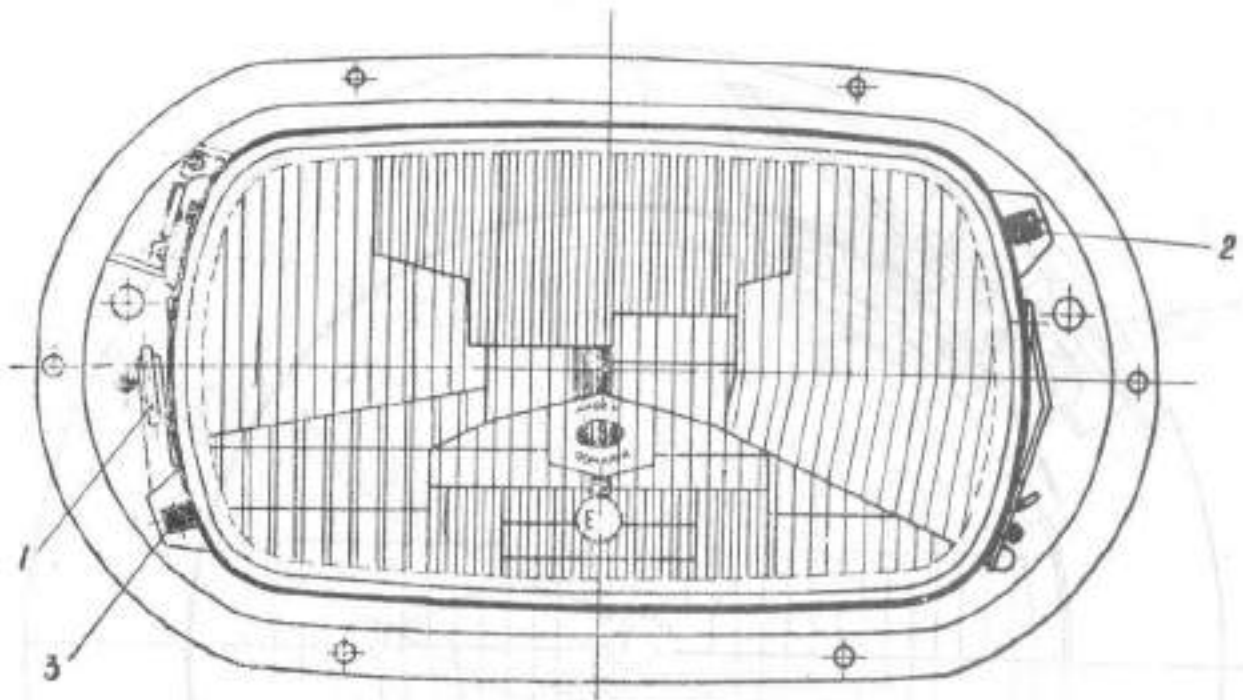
F E R RECTANGULAR HEADLAMP
